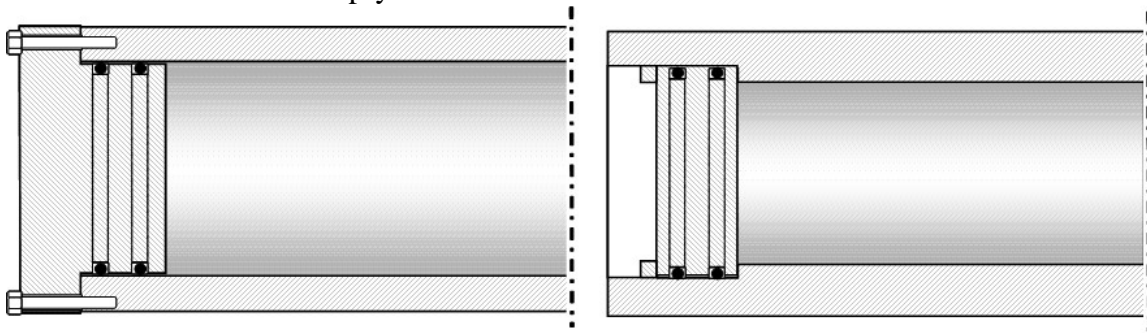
Insert lid container: Held in place by bolts (left) or by locking ring (right)
